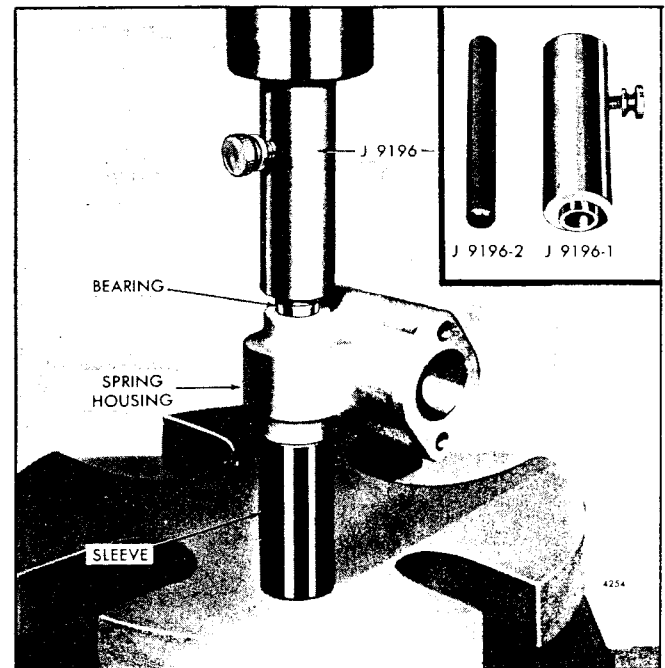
Installing Speed Control Shaft Bearings in Spring Housing
